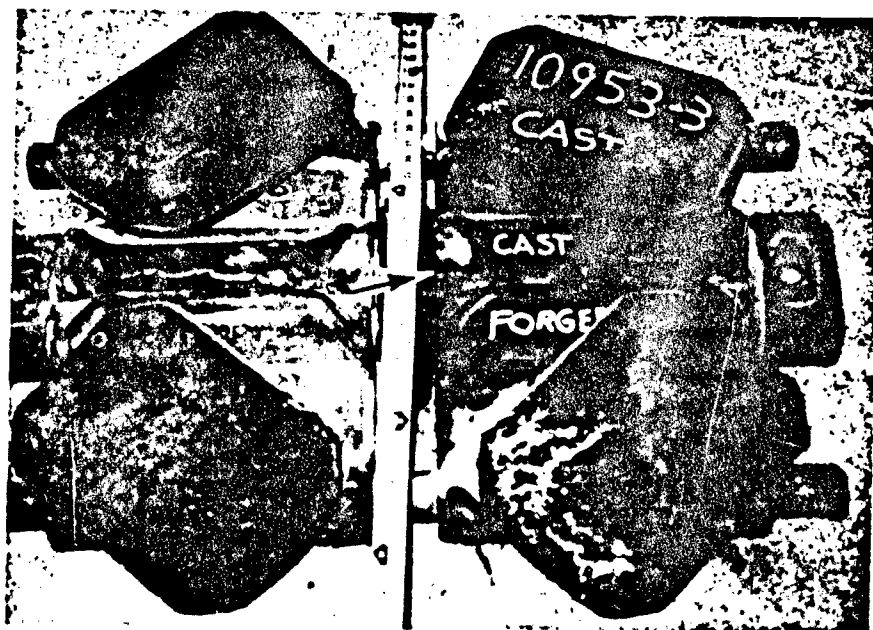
Cast - Forged Shoe Test, Note Crack at Arrow
